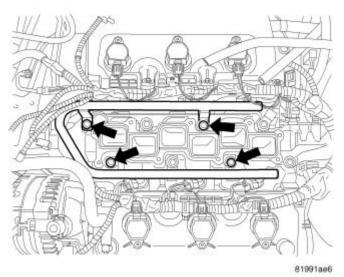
Identifying Fuel Rail Bolts Courtesy of CHRYSLER LLC
